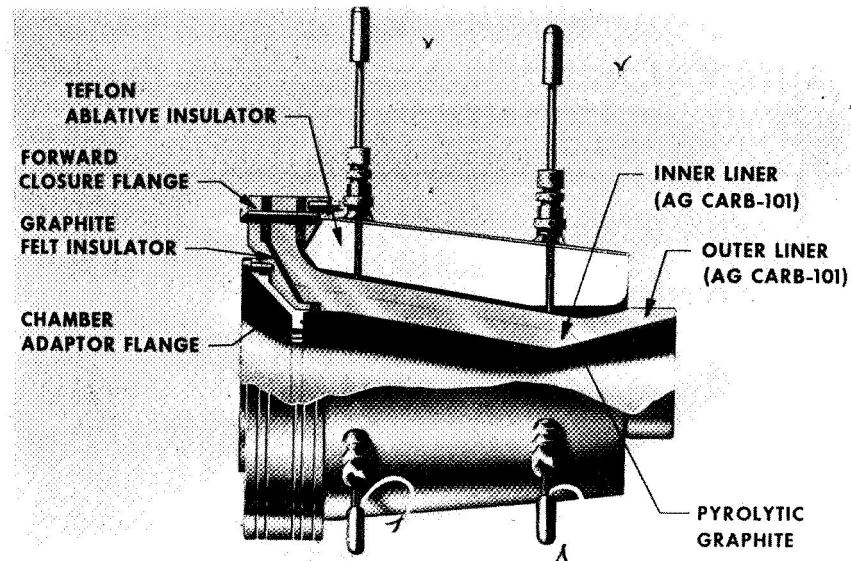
Oxygen difluoride-diborane chamber assembly.
